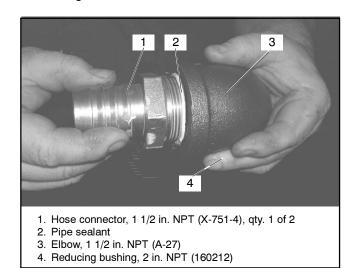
Elbow A-27 and Hose Connector X-751-4 Subassembly
